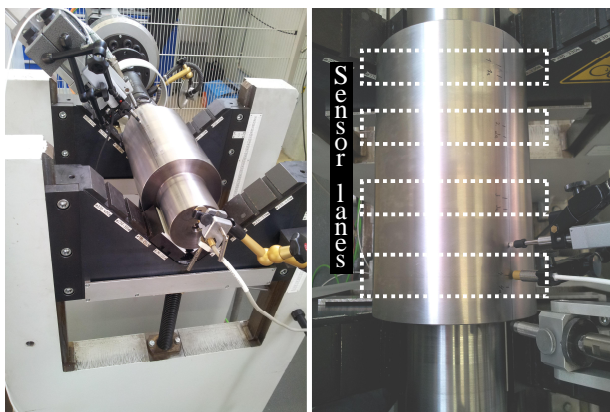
Test-Shaft in a Run-Out Bench (left), and with Four Marked Sensor Target Test-Surfaces (right)
